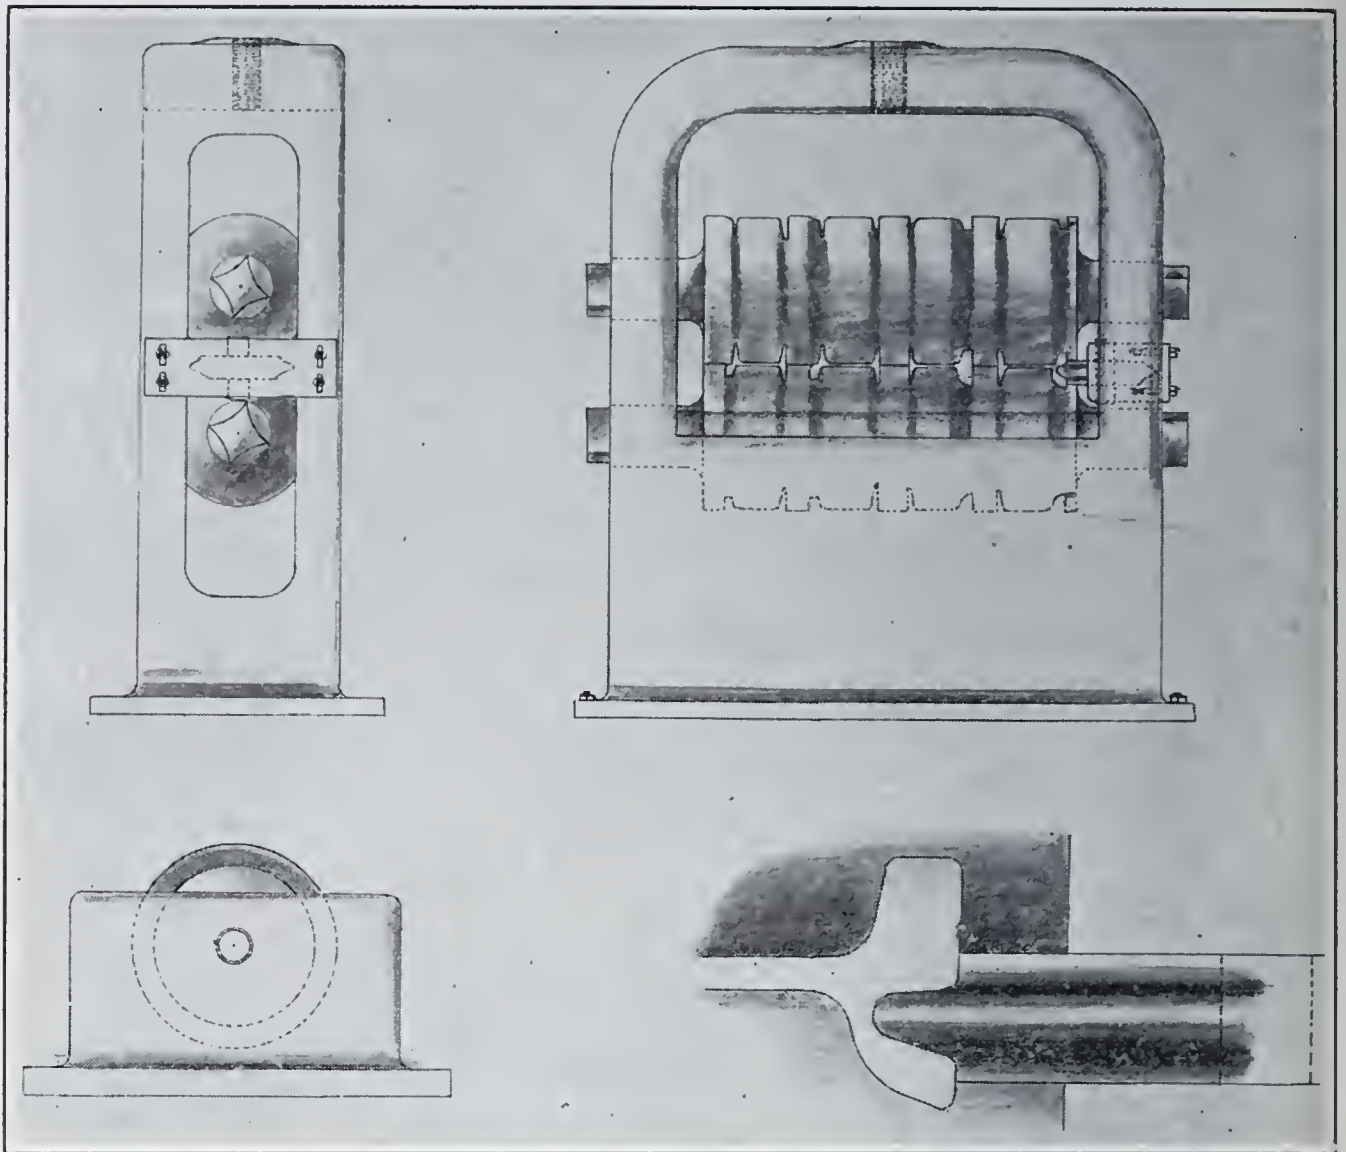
Side Roller for Rolling Grooves in Girder Rails.
